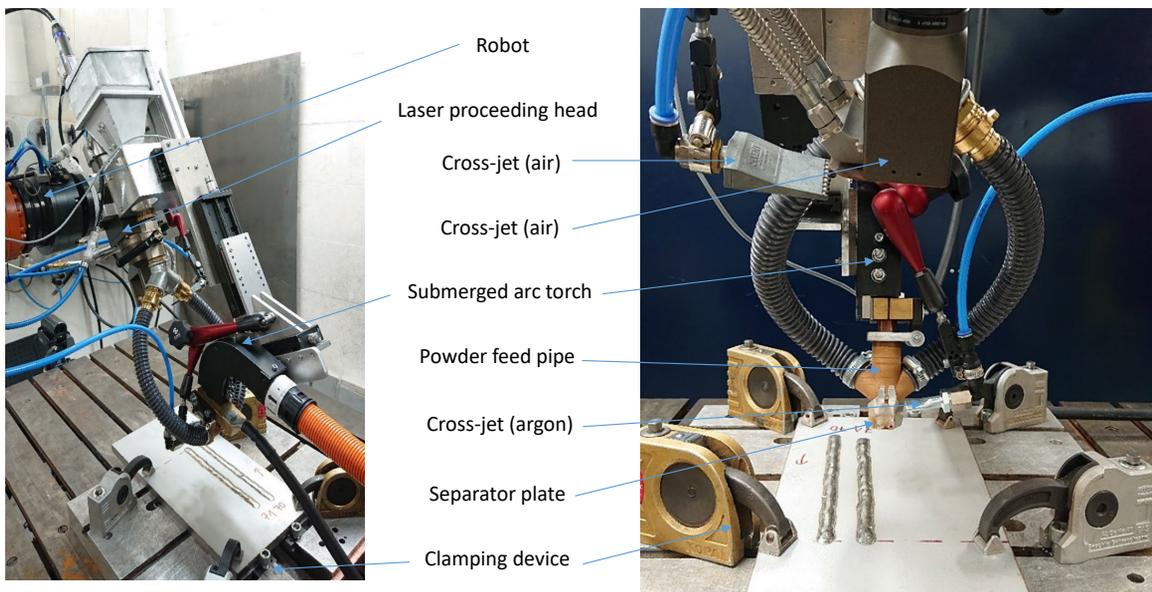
Experimental setup for laser beam-SA hybrid welding
